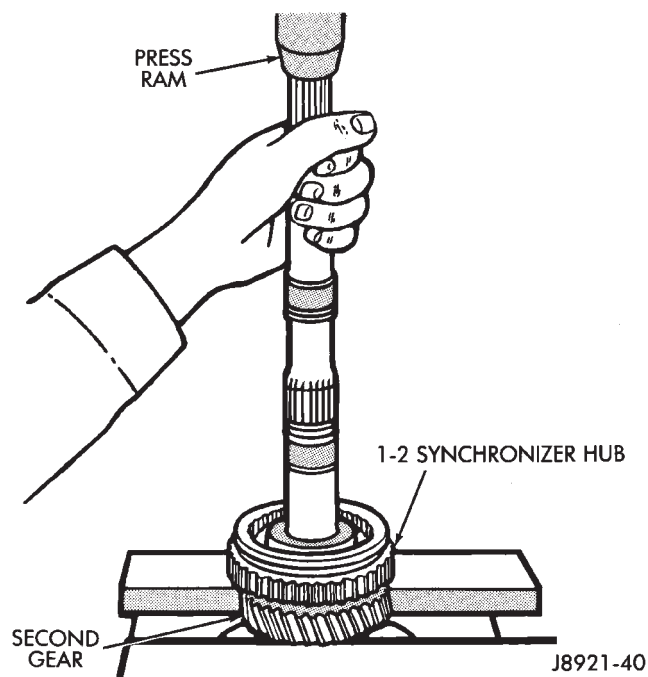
Second Gear And 1-2 Synchronizer Removal
